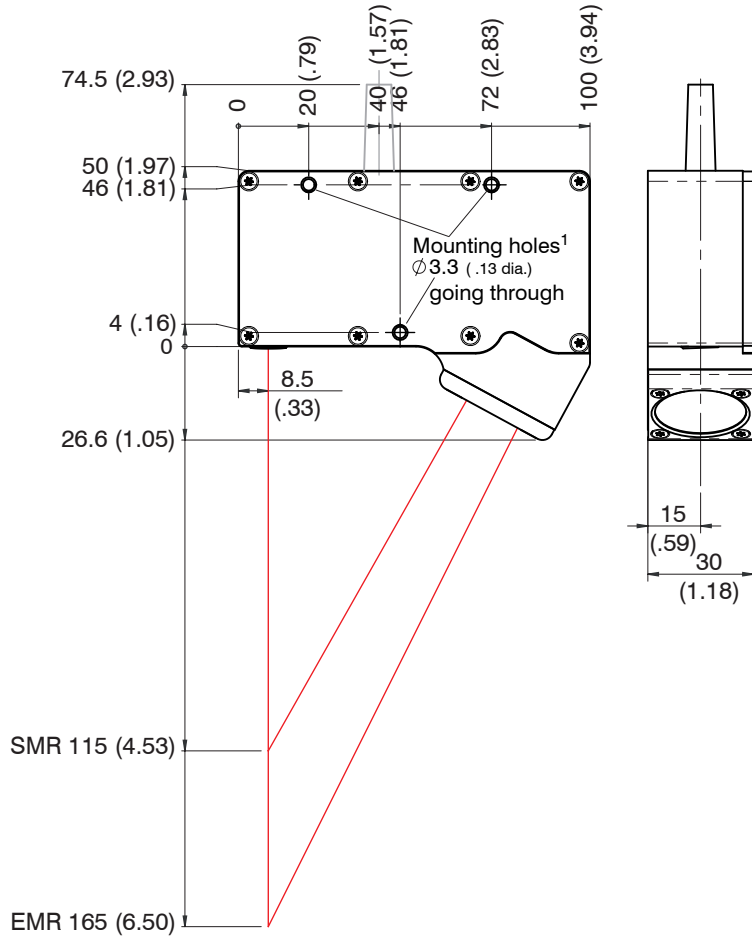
Dimensional drawing LD1610-20 / LD1630-20
